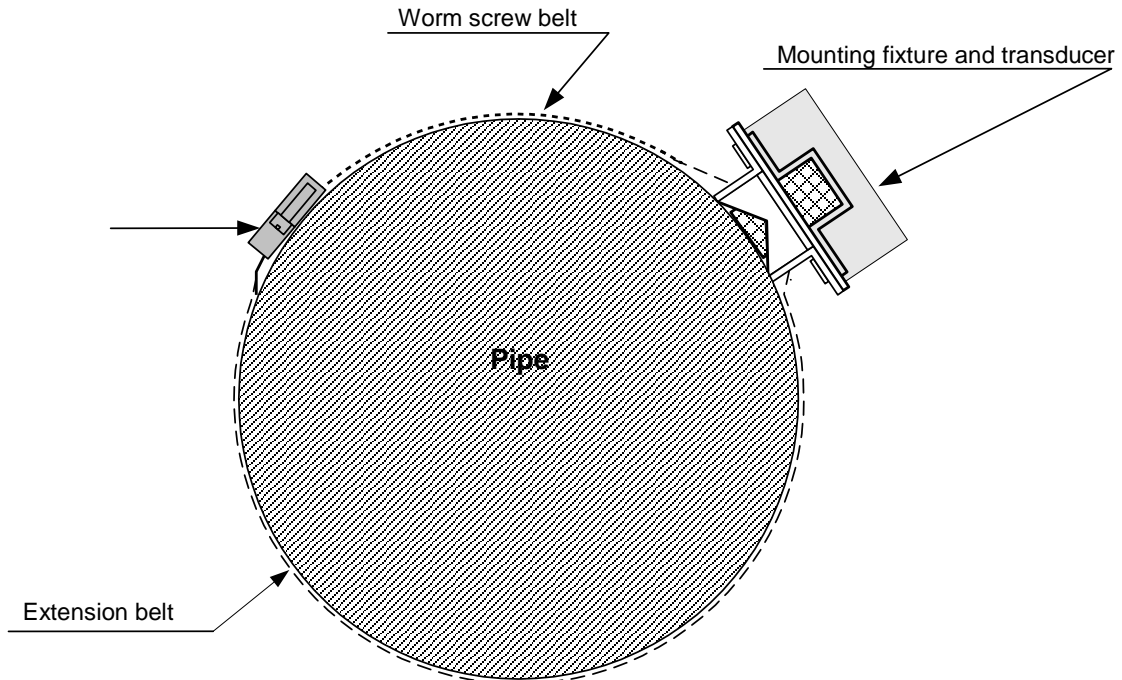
View of Completed Installation of Transducers for Small Dia. Pipe
